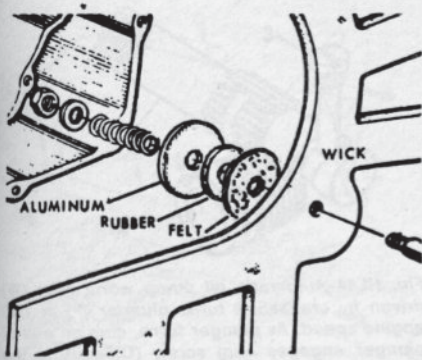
View showing proper assembly of wick, felt washer, rubber washer and aluminum washer on pickup stud.
